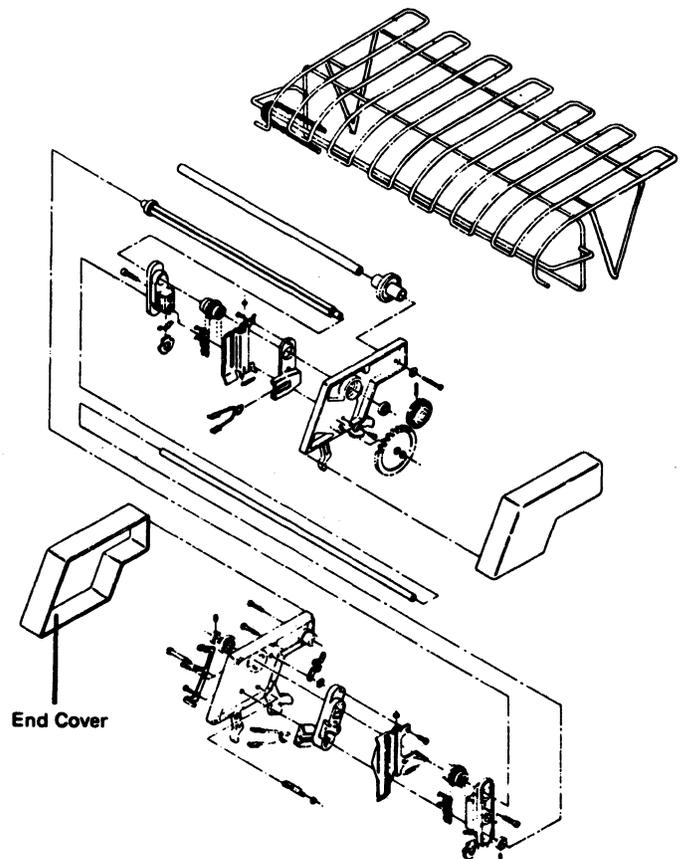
Forms Tractor Unit Disassembly and Assembly
